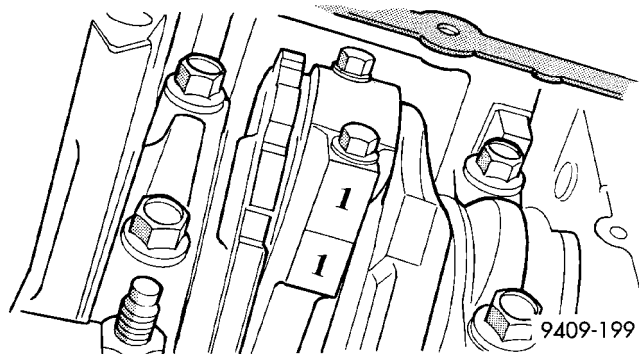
Identify Connecting Rod to Cylinder-Typical
